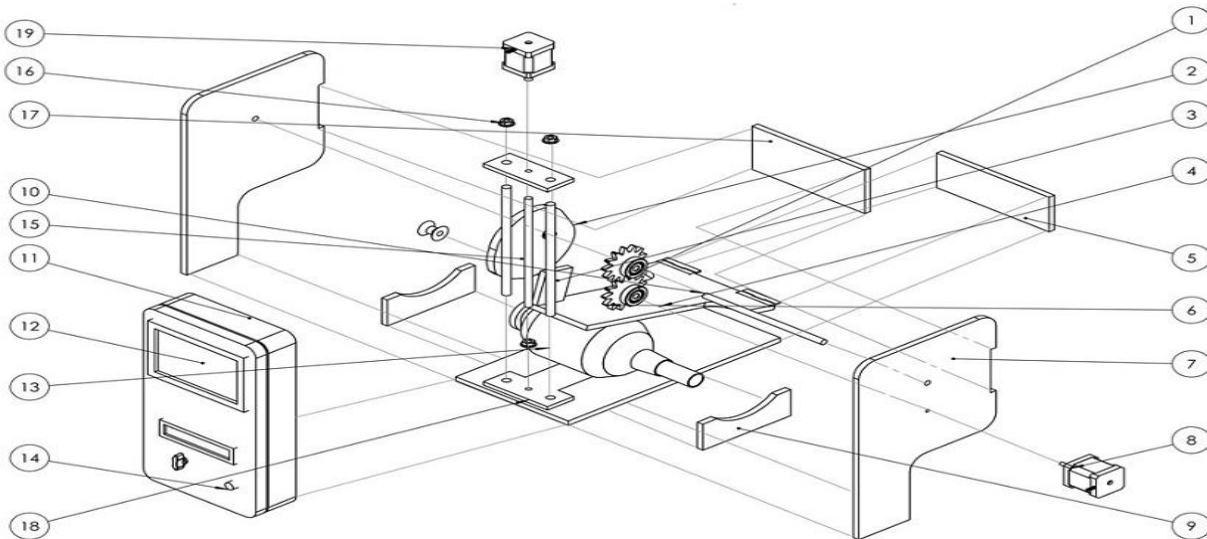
Exploded drawing of Prototype 1 of the mechanical ventilator
